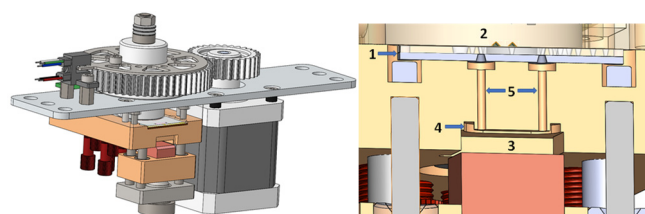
Left: CAD drawing of the rotary valve/ sensor chip assembly. Right: Cross-sectional view, 1: liquid handling chip, 2: Teflon rotor, 3: space in holder for sensor chip, 4: flow cell, and 5: inlet/outlet channel for the fluidic connection between the rotary cell and the sensor chip.
